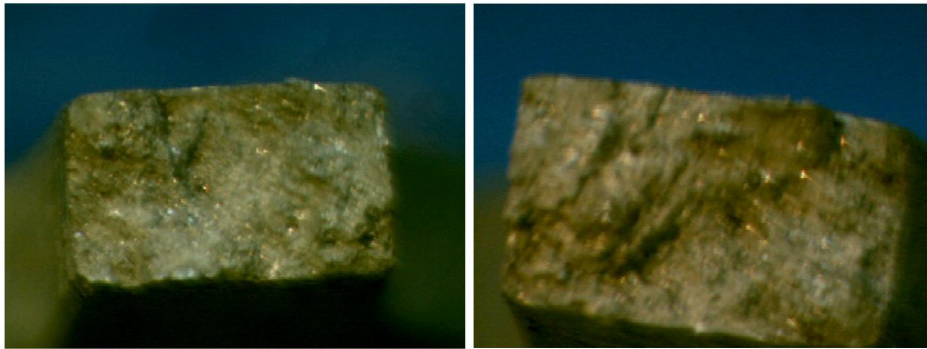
Fracture surface in welded samples: *a* – AlSi5 filler metal – transcrystalline fracture, surface very much alike the base metal; *b* – AlSi12 filler metal – coarse surface with massive pores and cracks.
